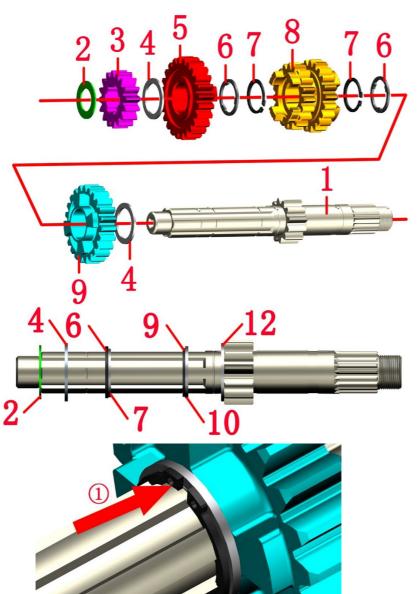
TR.	ANSMISSION	Gear shifting and transmission mechanism	CHK	401
